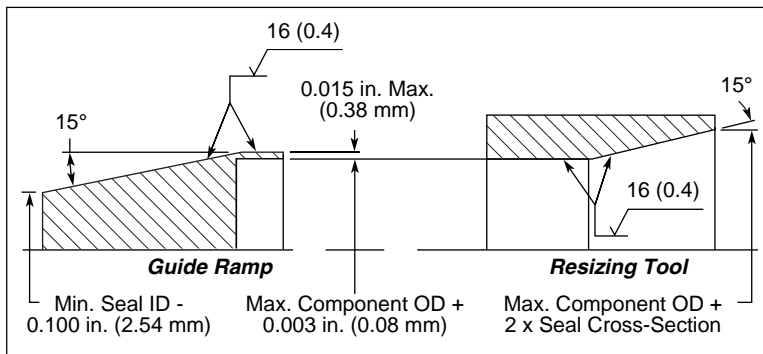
Stretching Guide Ramp and Resizing Tool
